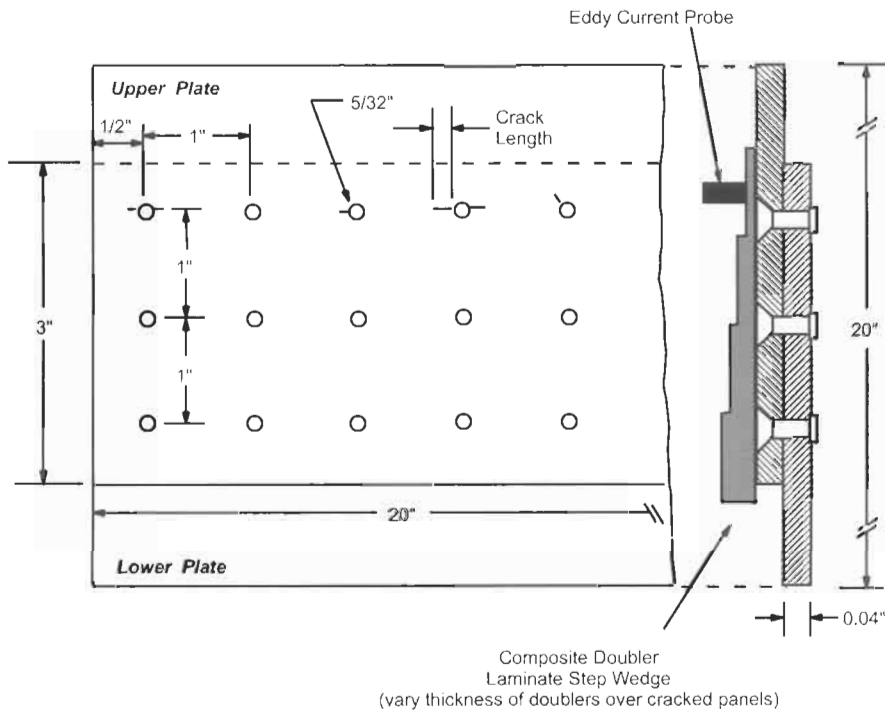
Test set-up for detection of surface cracks through composite doublers.
